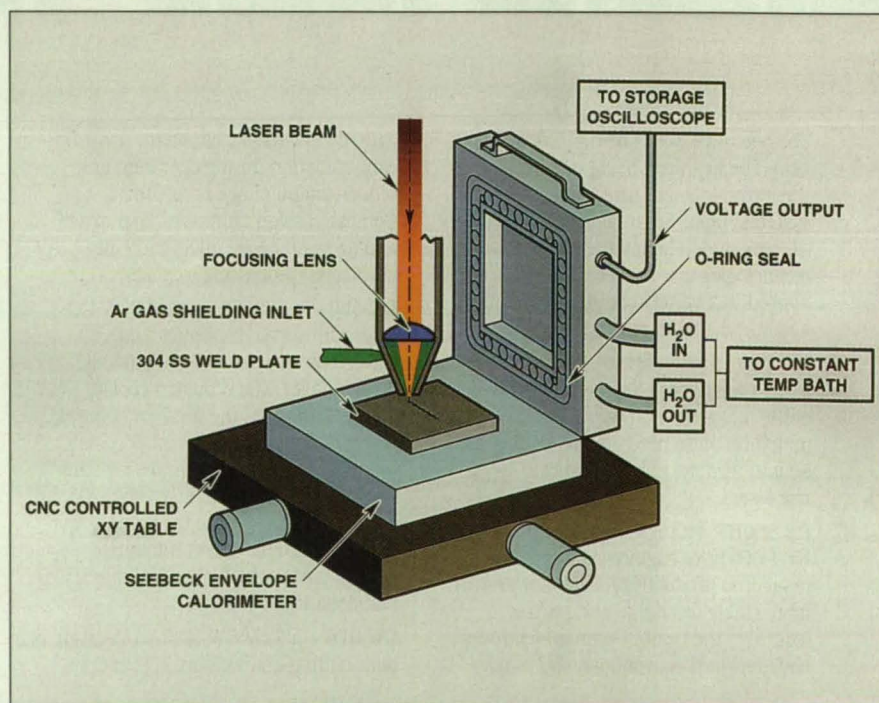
Carbon dioxide laser beam welding calorimetric experimental setup.
